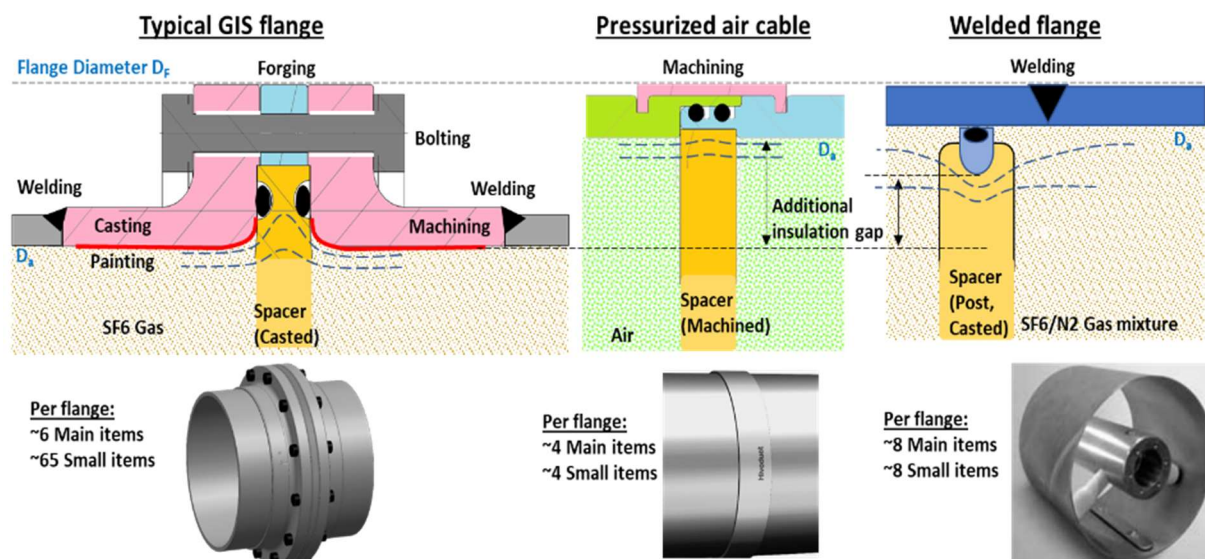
Comparison of flange designs: GIS, PAC, Welded flange (picture from [2]).
